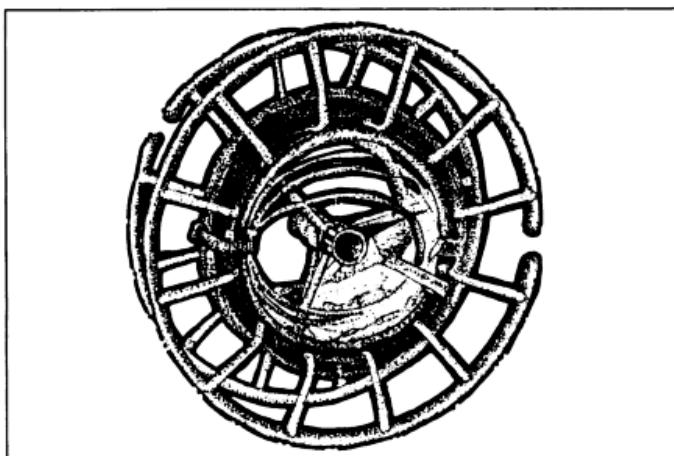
Cable Assembly CX-11230()/G, 33 Meters, Mounted on Reel RC-435/U
